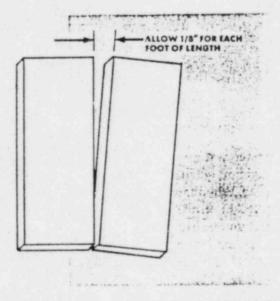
Provide a space between the edges to be welded.
